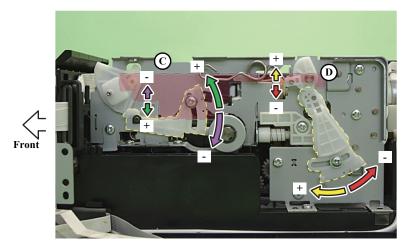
Operating the parallelism adjustment bushing (Right side)
